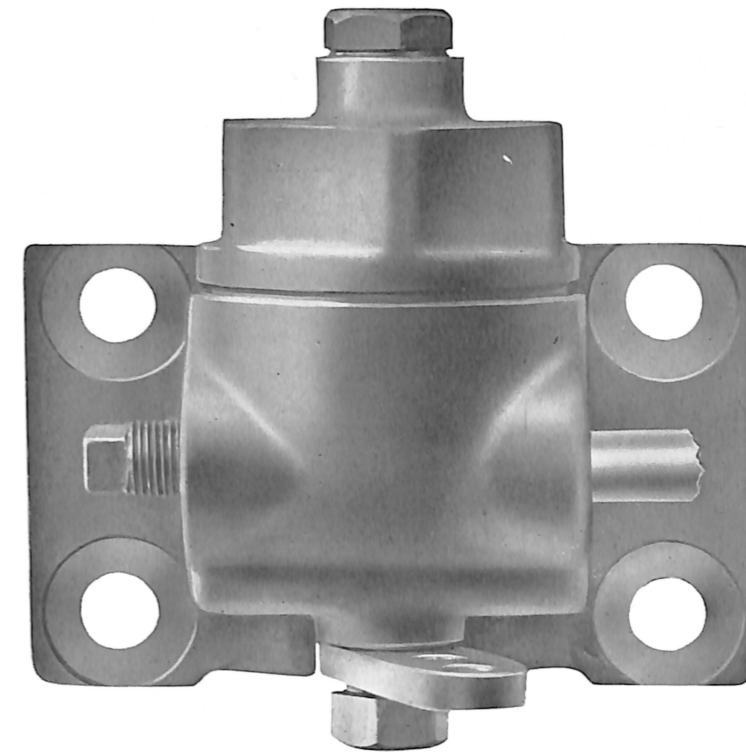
Rotary Valve for Engines of Types "E," "F," "K" and "L."
